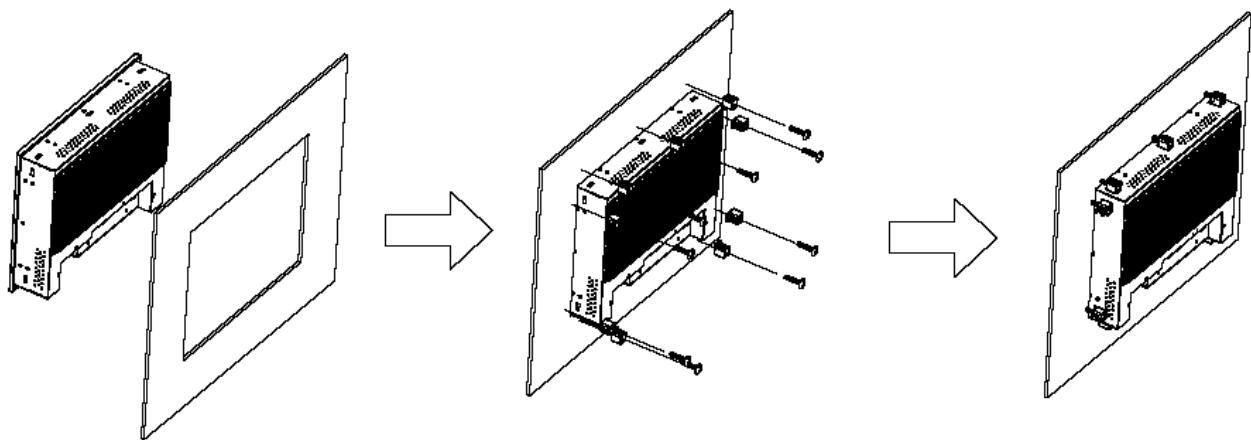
Panel mounting of the APC-3517B/3717B/3917B
